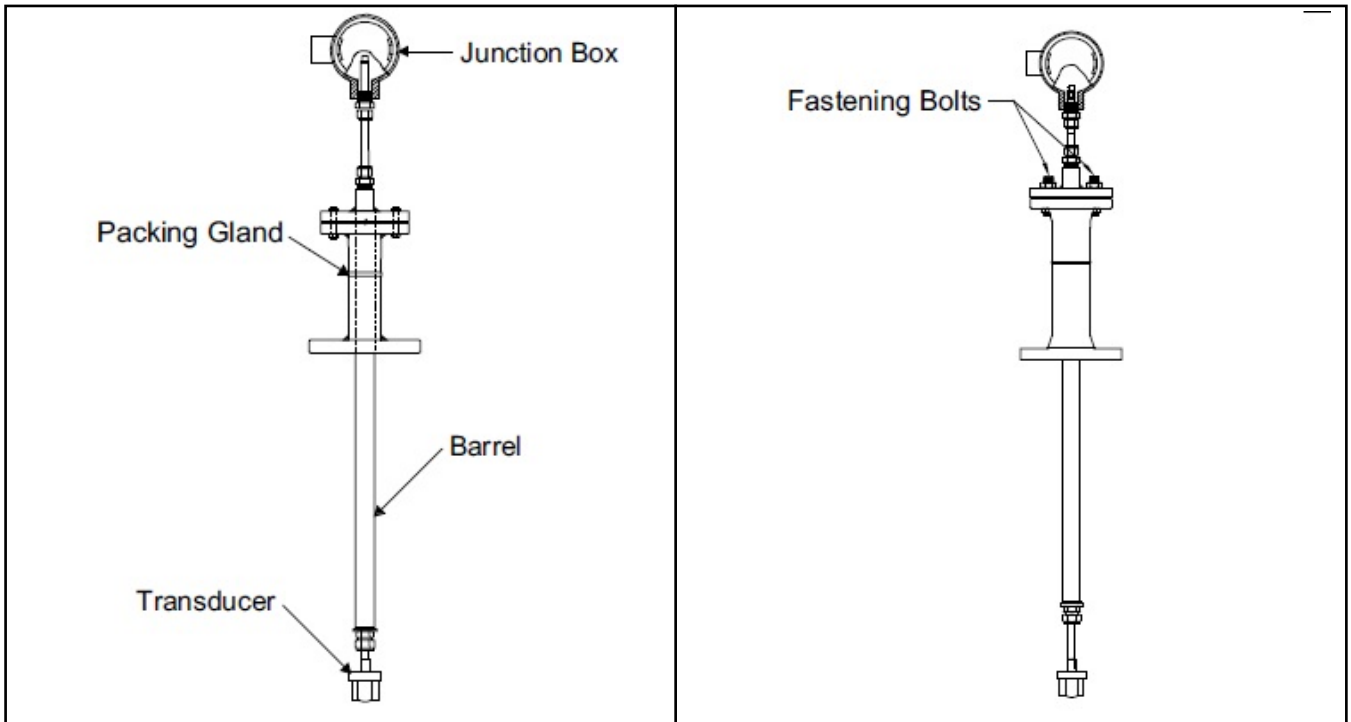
Insertion Mechanism Assembly with T17 Transducer
